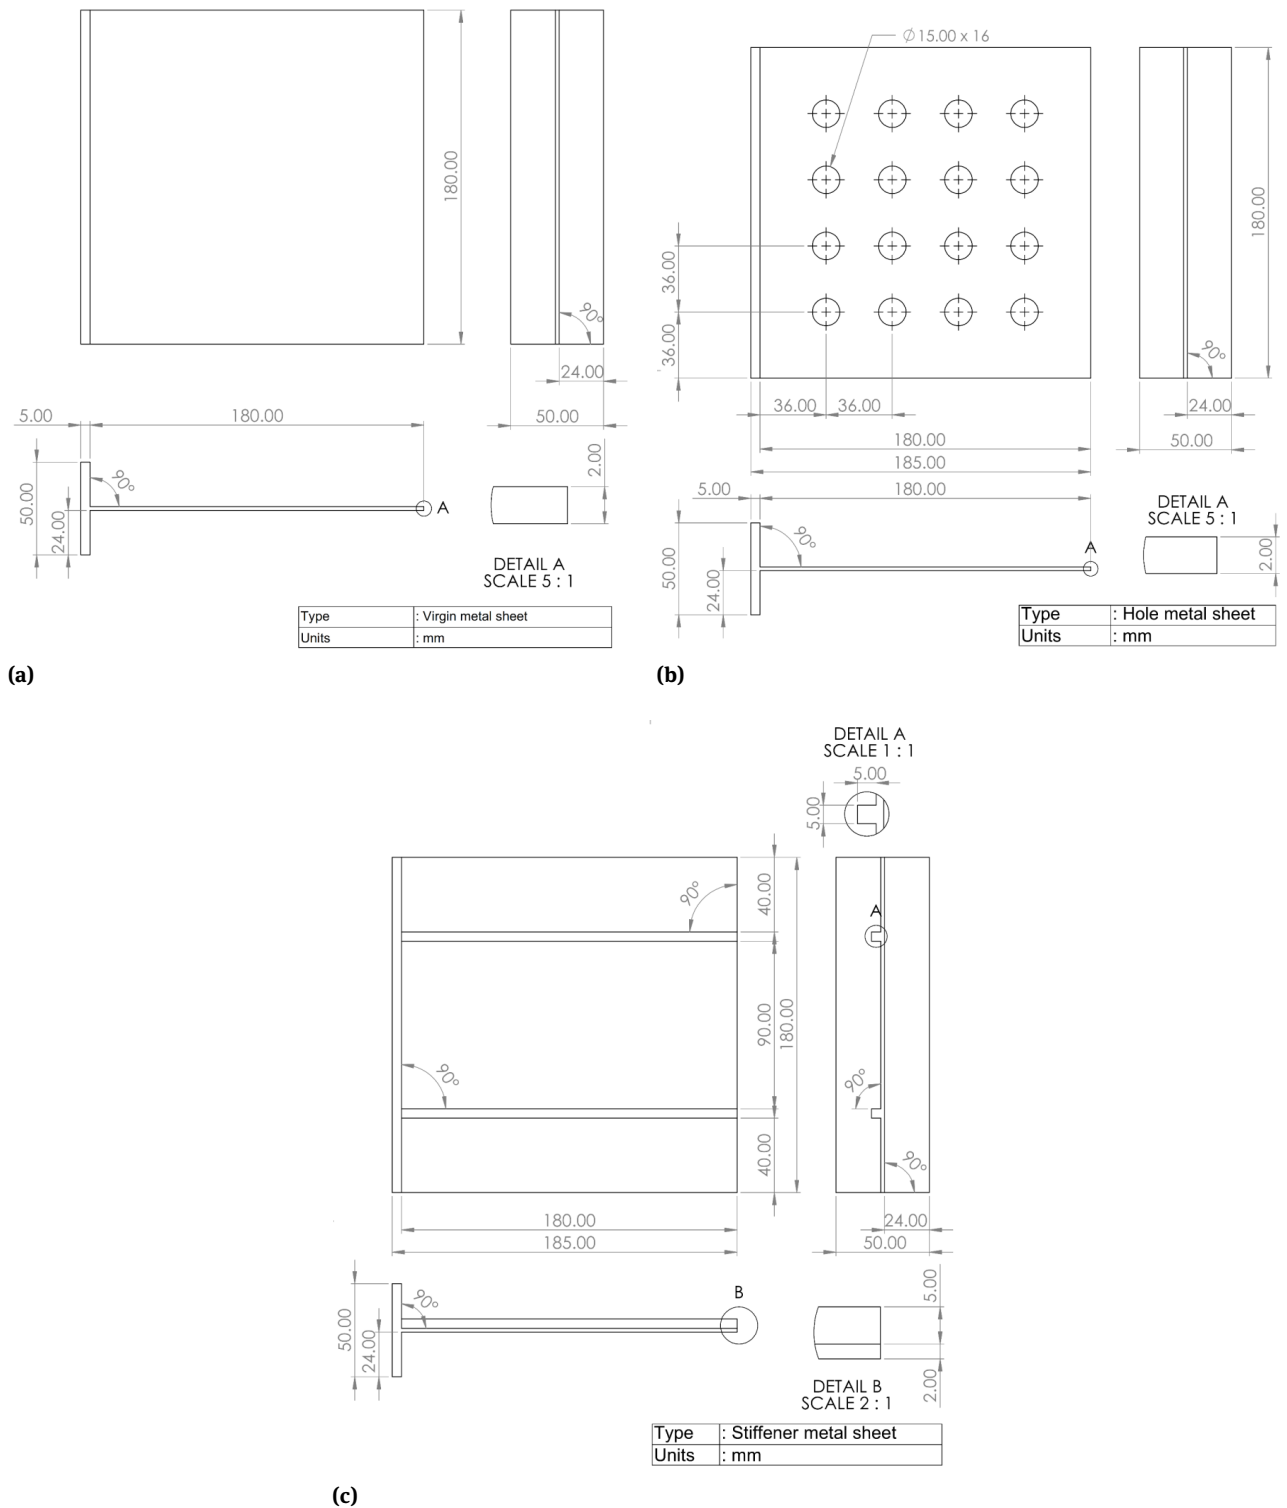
Technical drawing of models and sketch application: (a) virgin metal sheet; (b) hole metal sheet; (c) stiffener metal sheet
